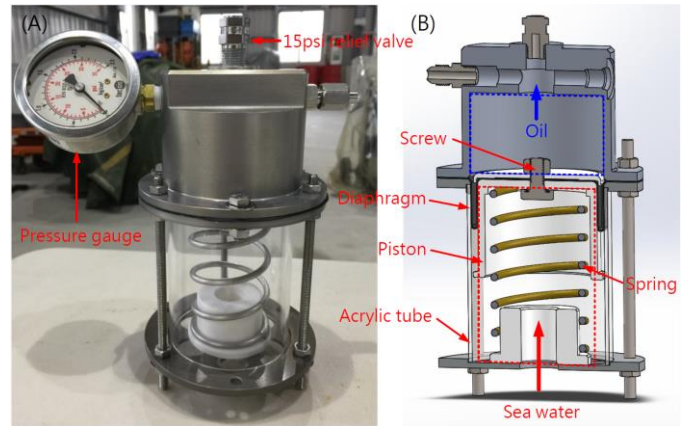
The 440-c.c. passive oil compensator. (A) Photo of compensator; (B) Section diagram of compensator.
